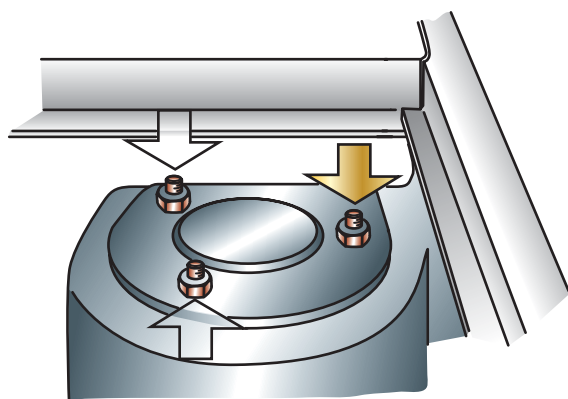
Nuts installed on upper strut mount bolts.
